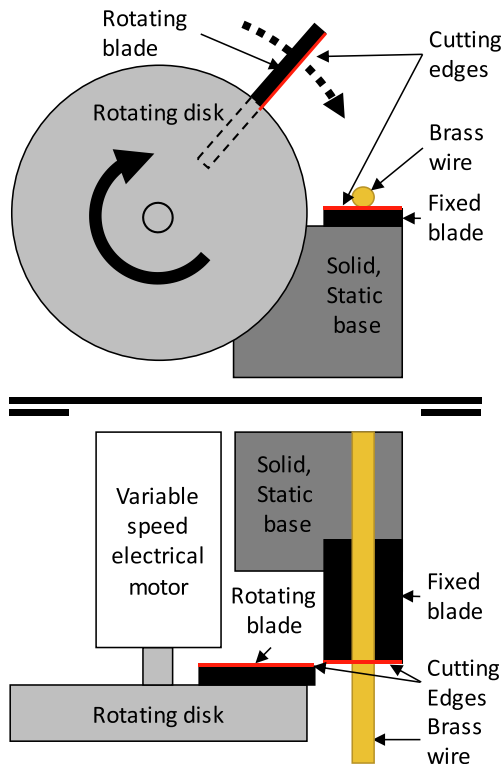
Sketch of the wire cutting system appended to the existing Electrical Discharge Machining equipment.
